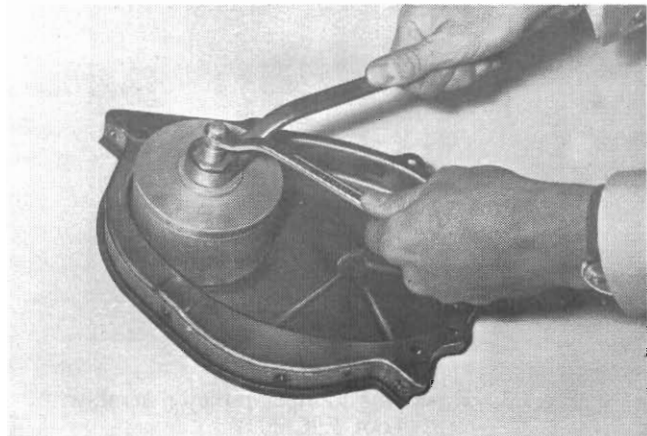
Removing oil seal (Tool E9C57 and Sleeve No. E9C57C)
